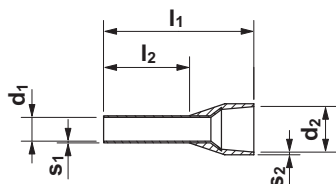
Dimensions (tolerances according to DIN 46228-4)
